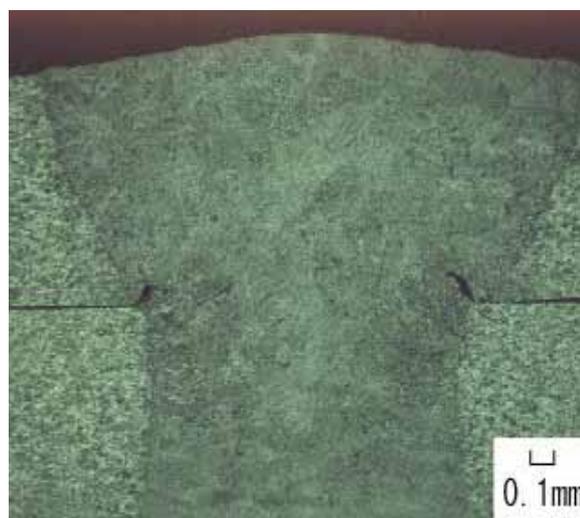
Macro structure of YAG laser lap weld zone.
